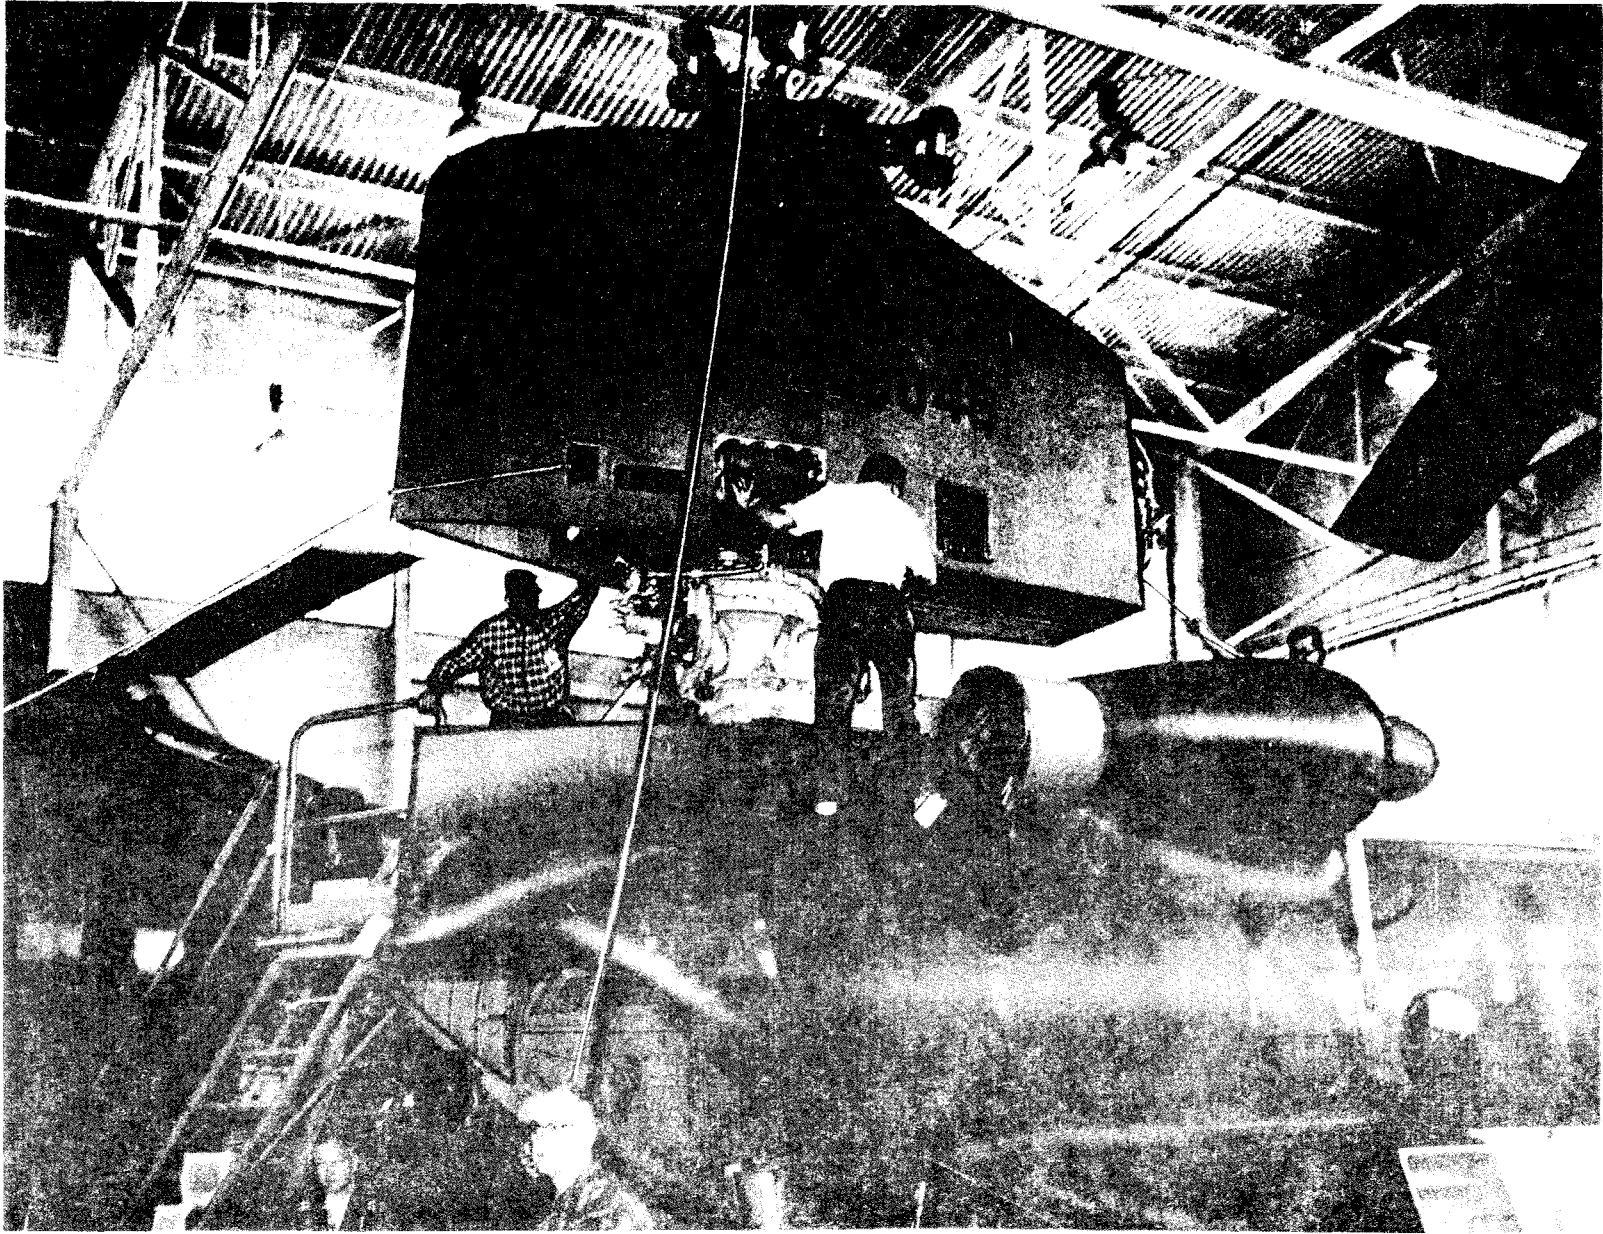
Removal of Aft Pylon Using Hoisting Adapter on Aft Drive Shaft
